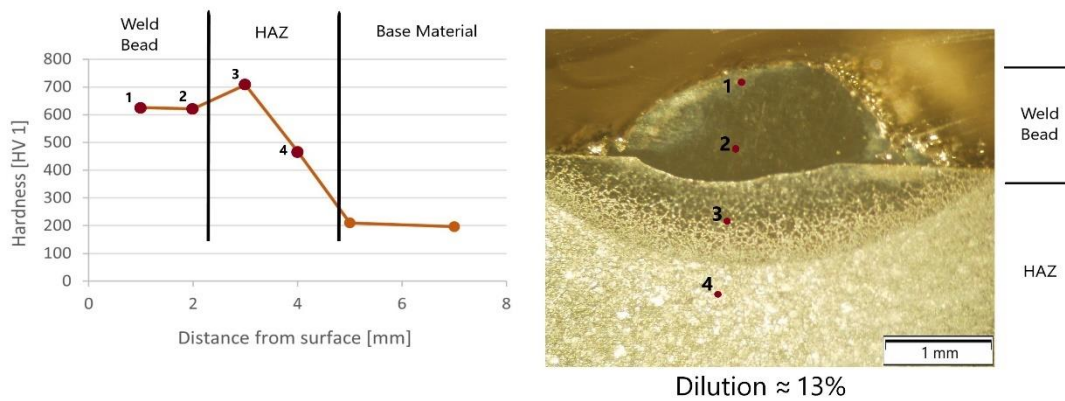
Welding Current: 70A; Welding Speed: 600mm/min; Powder Feed Rate: 10.4g/min (6)
